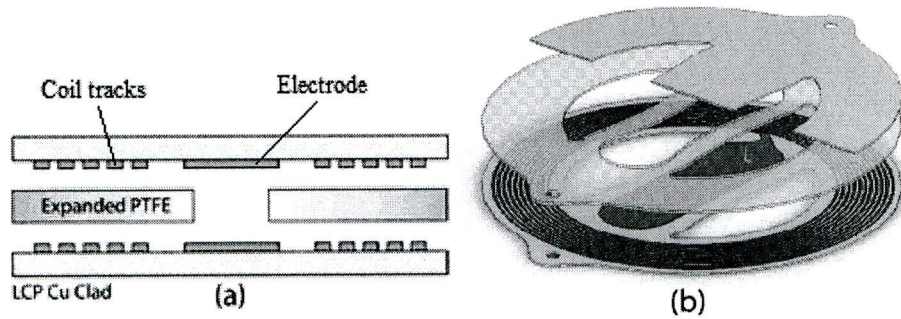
Sensor lay up for acute use. (a) Cross-sectional view and (b) perspective view of the LCP sensor design [Fonseca, 2006].
